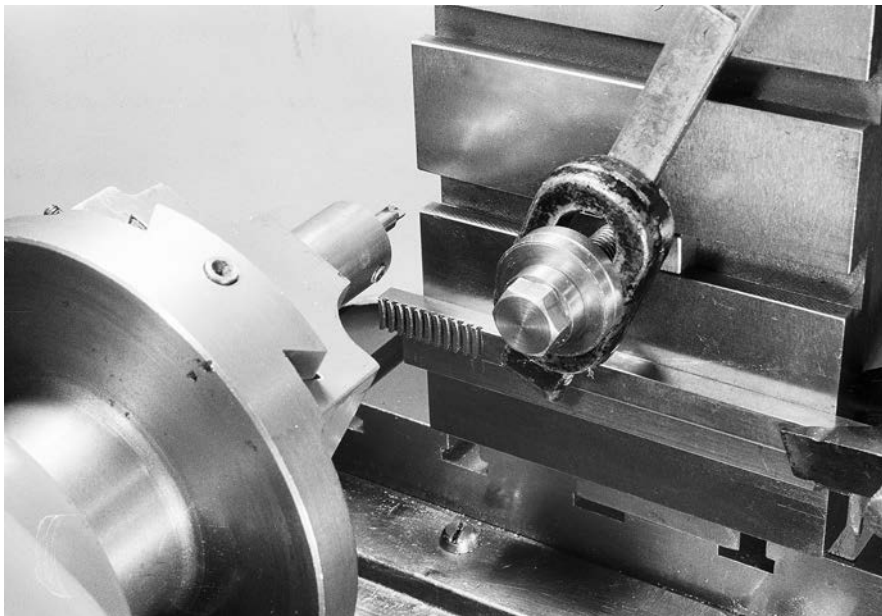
Using a Westbury boring head to cut the scroll nut teeth
